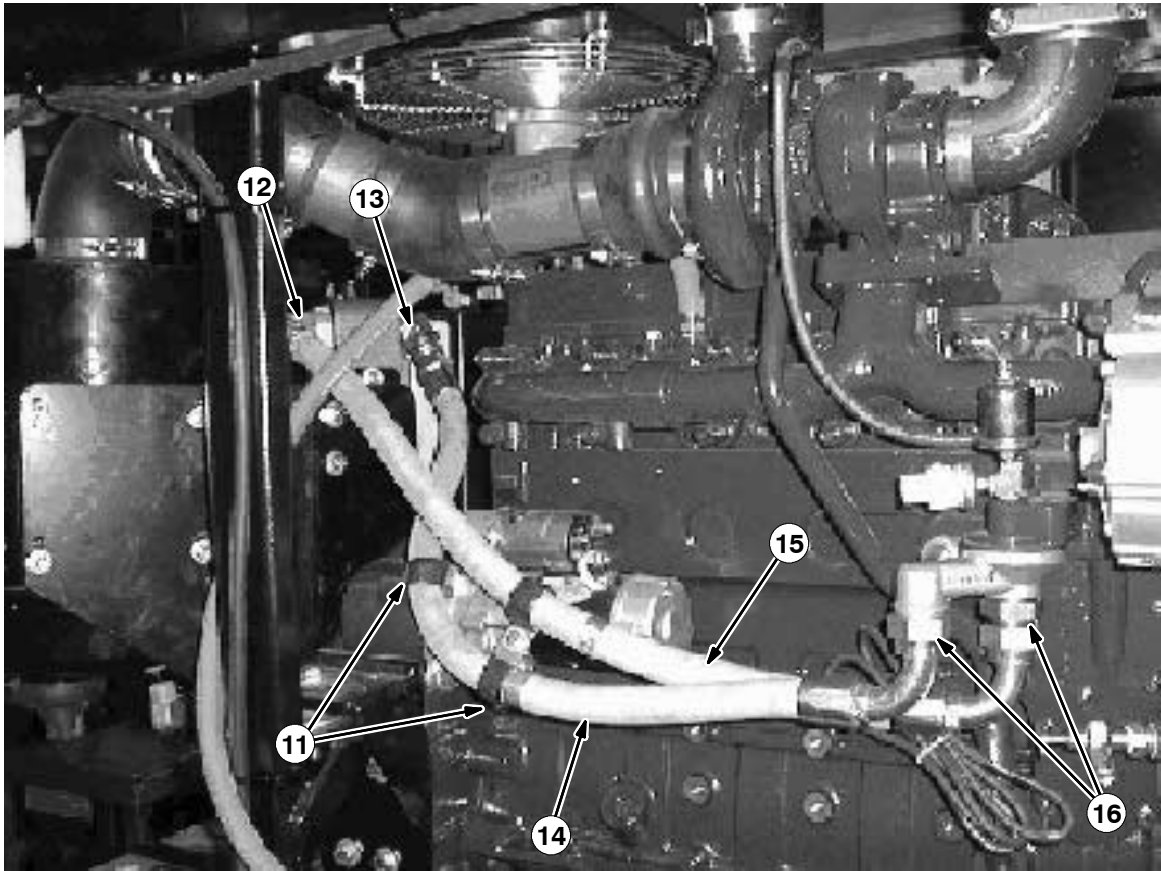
Cummins 6 Cyl. Air Cooler Group
